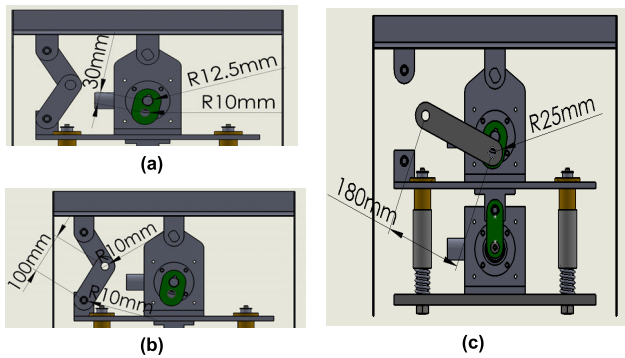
Design of the roll axis structure, (a) dimensions of the crank shaft, (b) dimensions of the structure's toggle and two-bar linkage (c) dimensions of the structure's toggle and two-bar linkage.
